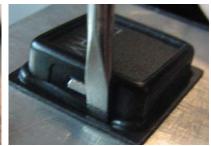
A AND FIGURE 4B – ENGAGING PUSHBUTTON
